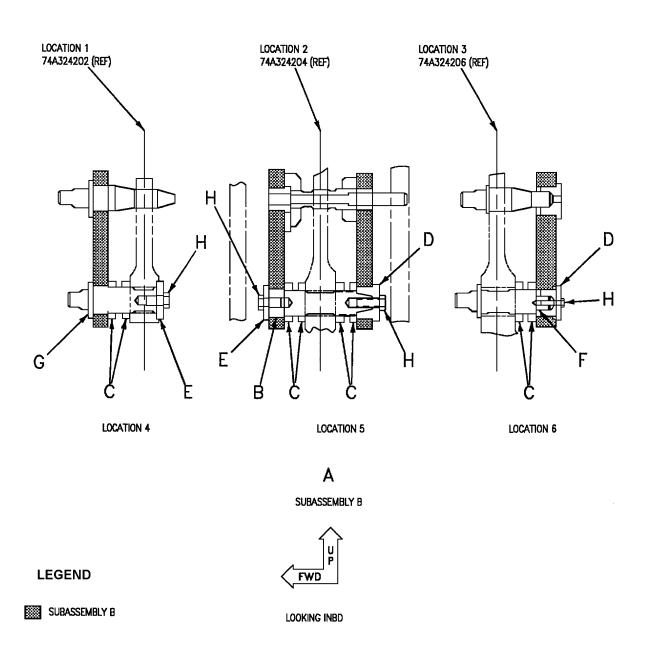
Setting Up to Machine I.D. of Any Bushing or Lug Hole in Upper Row (Sheet 1)
